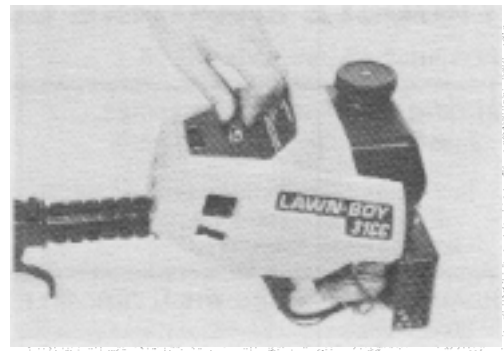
Slide Cover forward on Boom as Starter Handle is tucked thru opening. Remove Cover.
